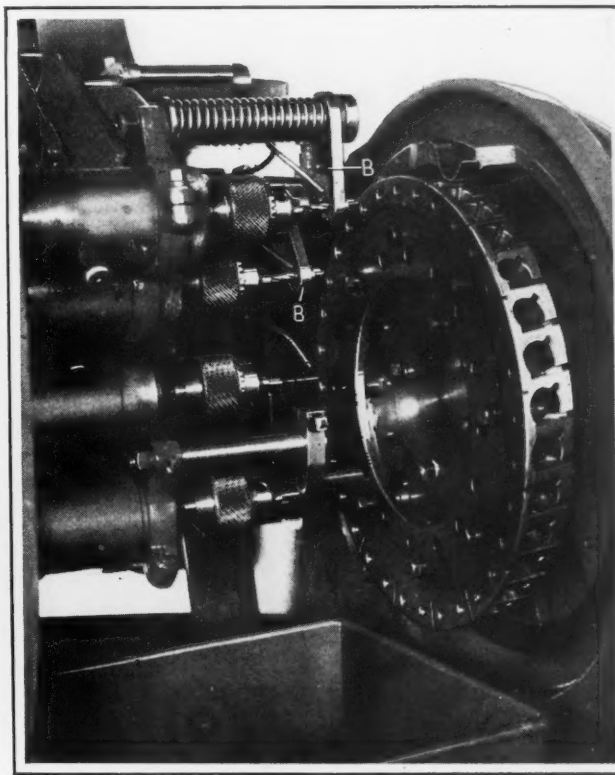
Close-up View of the Drilling and Tapping Spindles and Feed Dial
